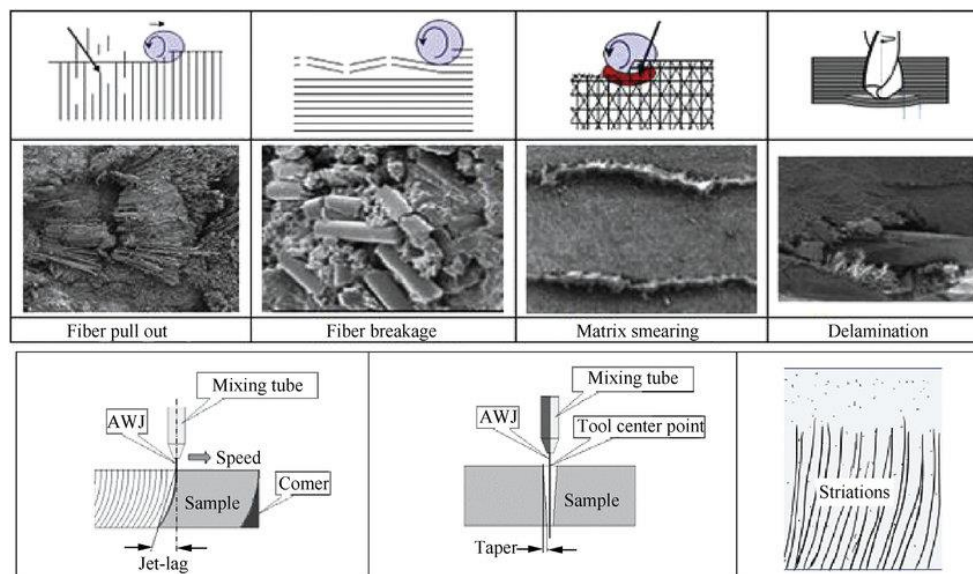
Surface failures resulting from machining of FRP with different cutting tools (Altin Karataş and Gökkaya, 2018).
